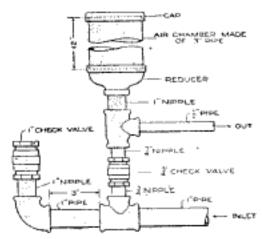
Assembly Drawing of the Pipes and Fittings of Which the Ram is Made
